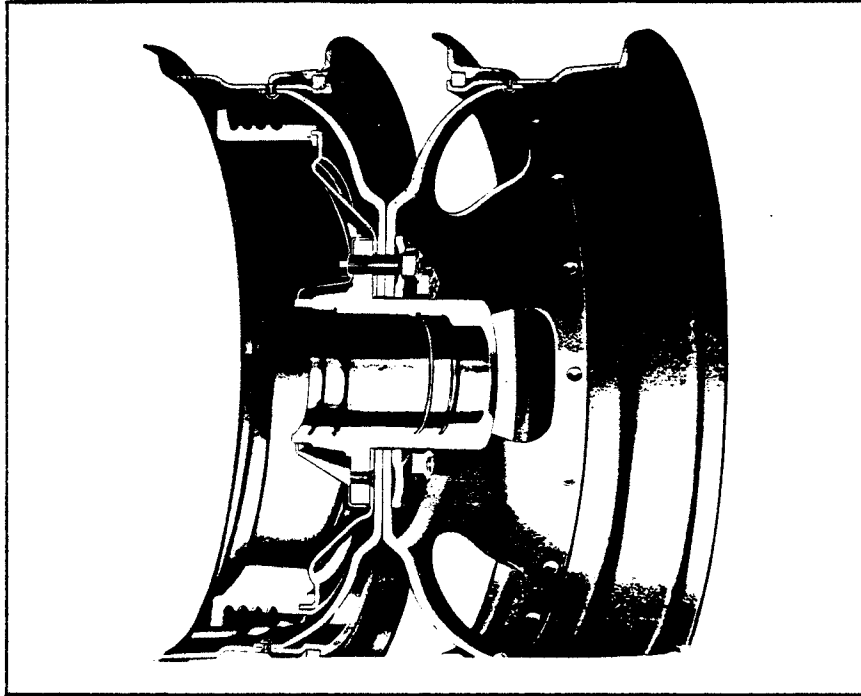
Dual Disc Wheels, Three-Piece Lock Ring, with Nut and Plate Securement
